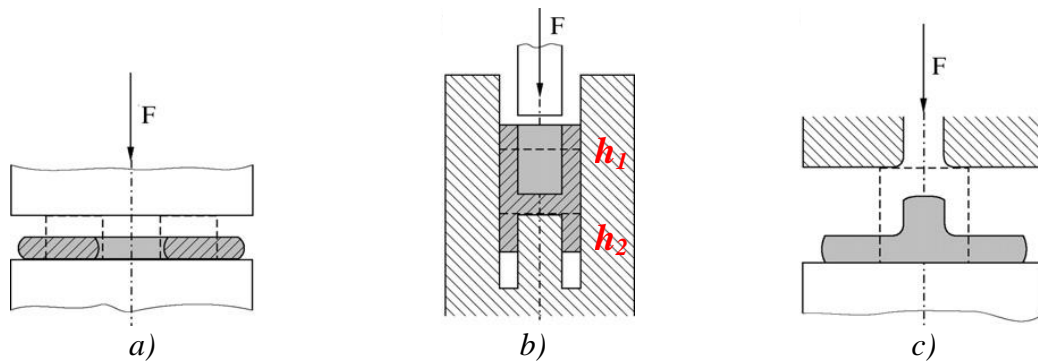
Indirect friction tests, where friction is determined from the change of the specimen's shape (the specimens are marked gray): a) ring-compression test performed [162,163], b) double-cup-extrusion test [170,172] and c) spike test [175].
